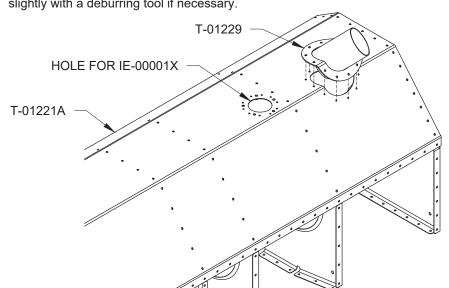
FINAL-DRILLING THE FUEL TANK INLET ASSEMBLY
